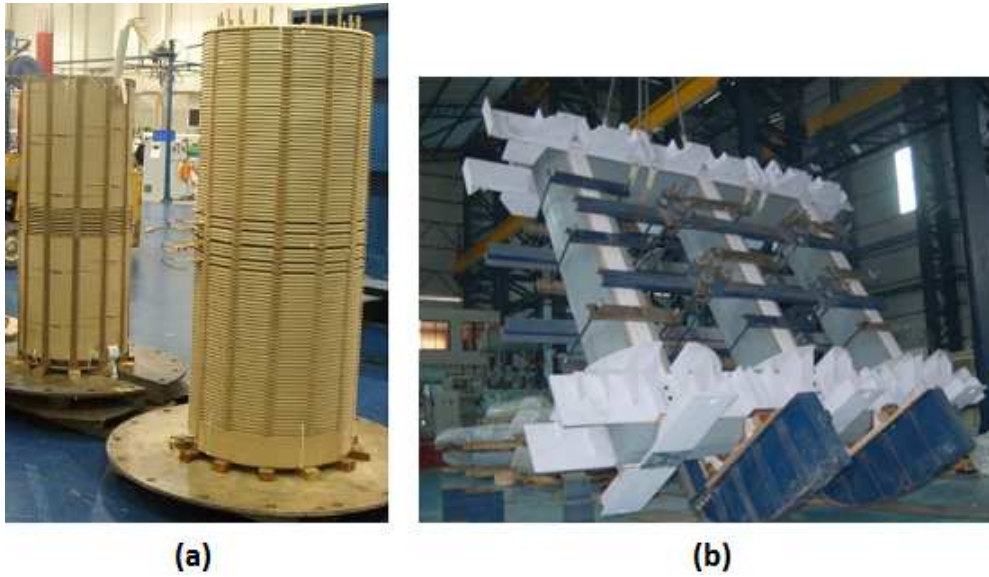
(a) Power transformer windings [5]. (b) Power transformer core assembly [4].
